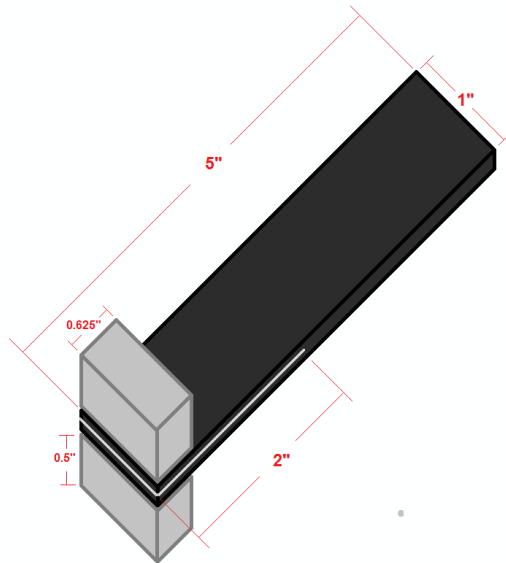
Schematic of a DCB Test Coupon showing dimensions.
